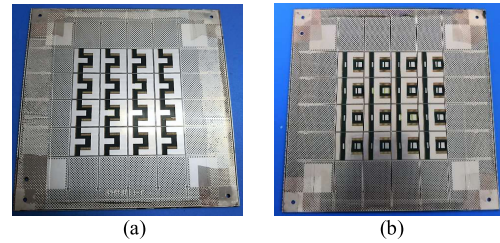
Double-sided RDLs of the panel-level PCB-embedded package. (a) Front side. (b) Backside.
